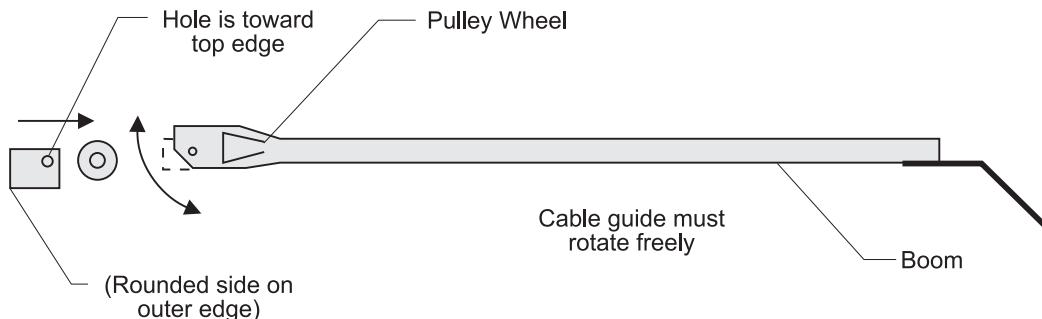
Mounting cable guide and pulley wheel to boom.
